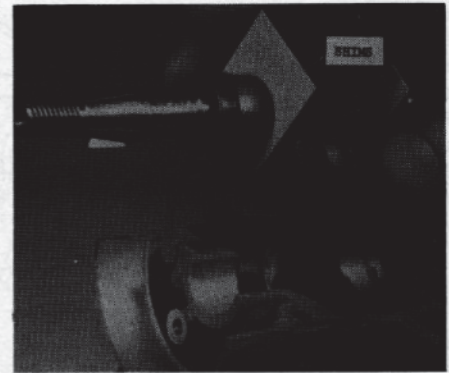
View showing placement of shims (Fig. HL325) between thrust washers (9—Fig. HL324) and bearings (10) for correct crankshaft assembly. Refer to text.
